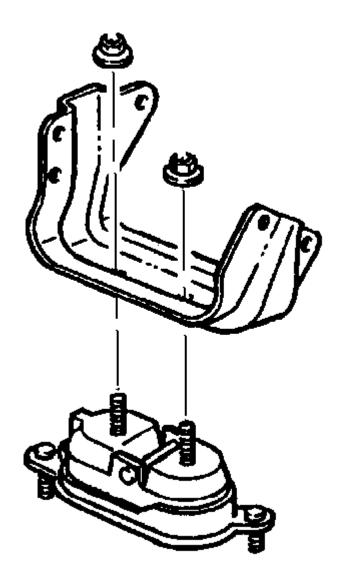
Engine Mount To Engine Mount Bracket Nuts Courtesy of GENERAL MOTORS CORP.
